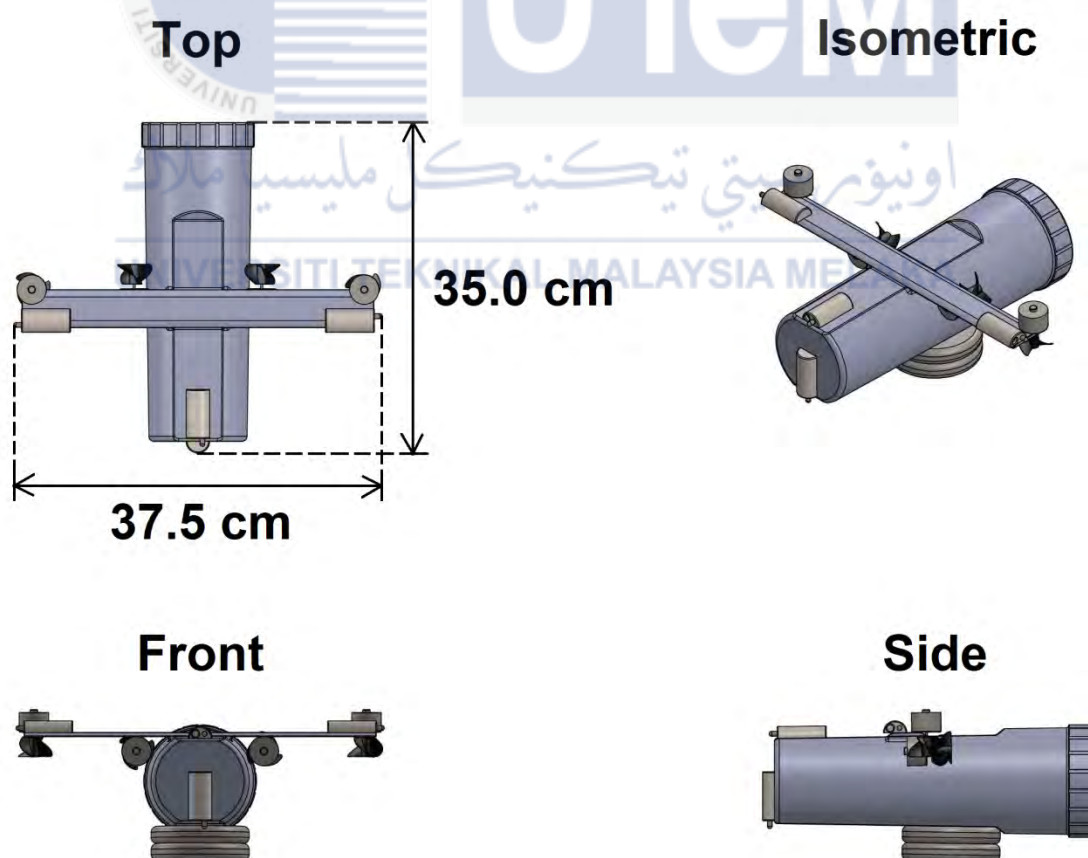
Isometric and Three Plane Views of Prototype Design
